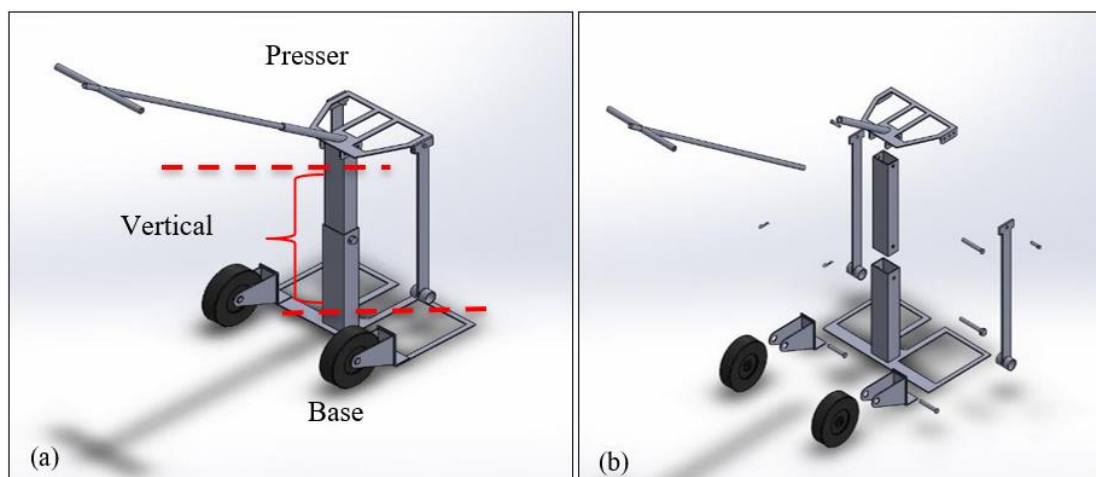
(a) Assembly design and (b) Exploded view Portable Mackintosh Probe Extractor using SolidWorks 2019 software
